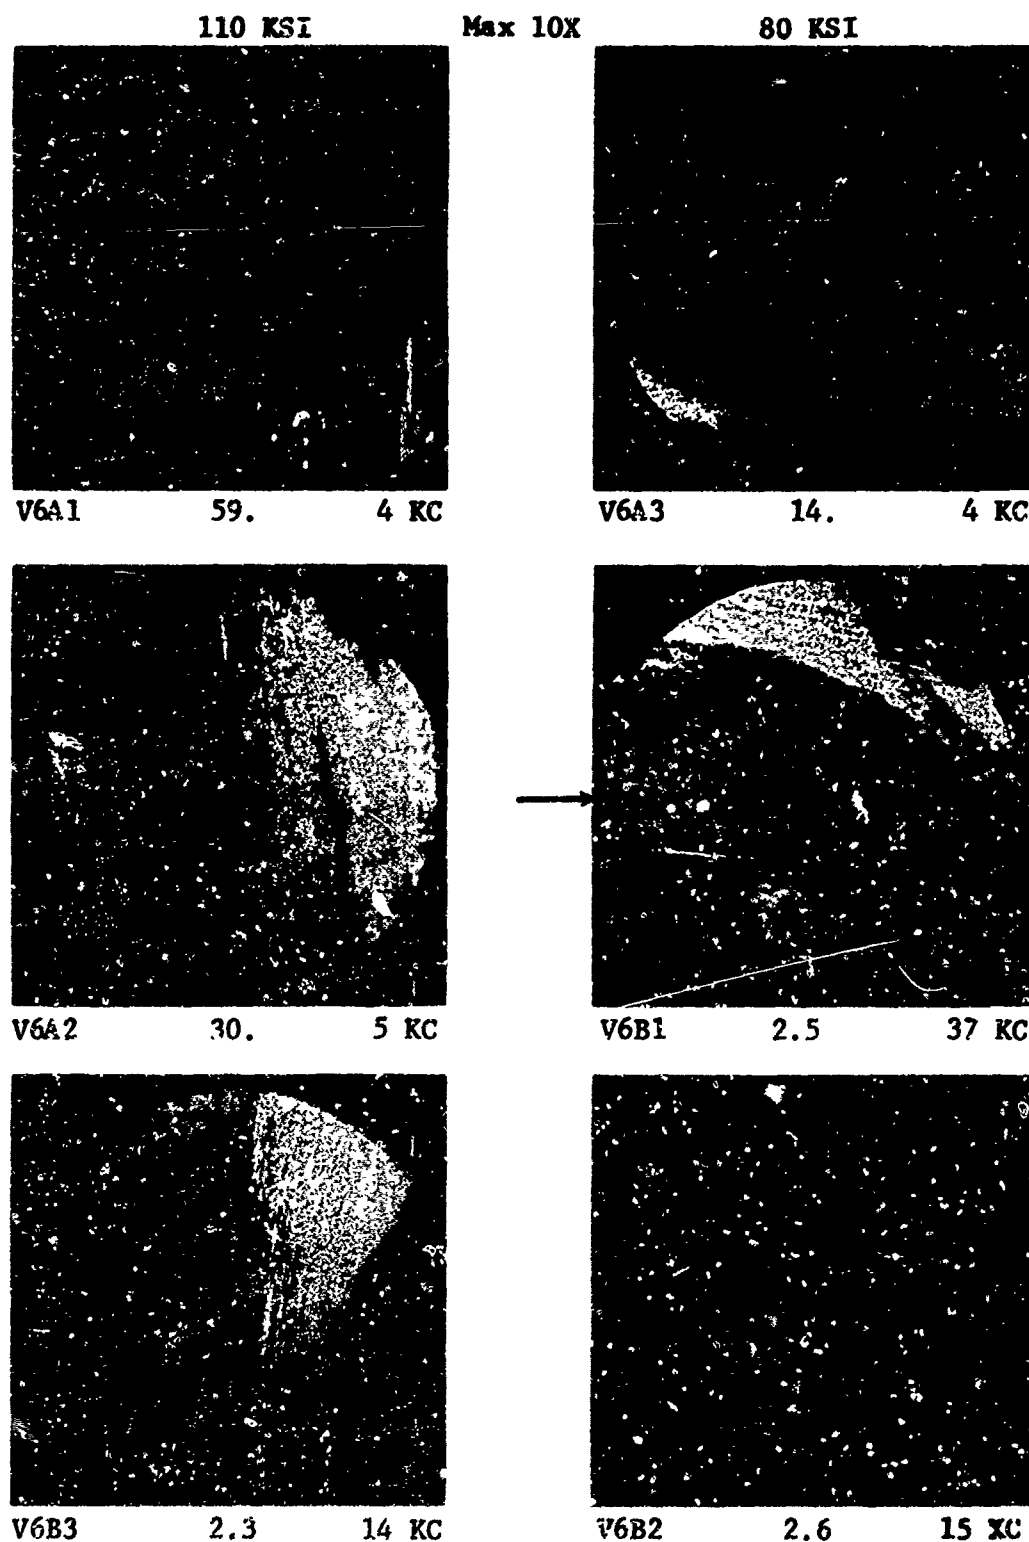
Fracture Surfaces of Failed Fatigue Specimens Series V6-Multiple-Bond/3-Axis Diffusion Bonded with Alpha Case Contamination
